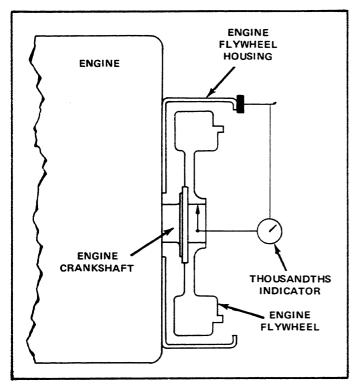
Checking Pilot Bearing Bore of Engine Flywheel.
